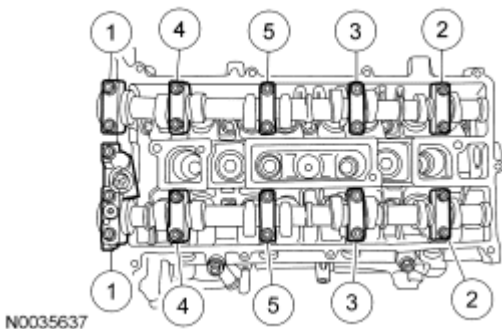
Identifying Loosening Sequence Of Camshaft Bearing Cap Bolts
